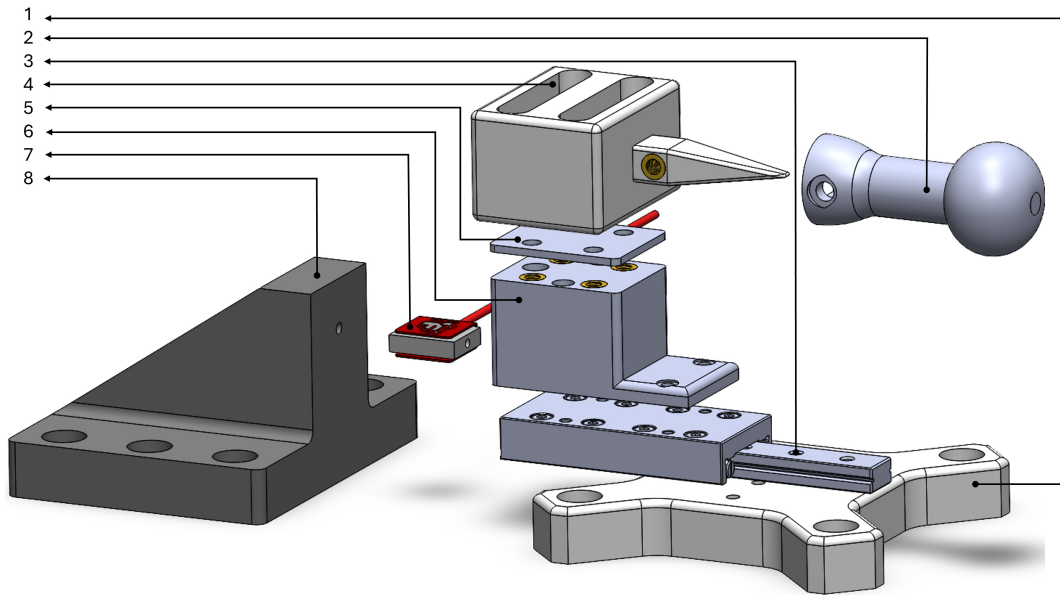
Exploded view of the Measuring stage: 1: Connection plate for the linear guide, 2: Test object, 3: RTS-2065 Linear guide system, 4: Object mount, 5: Plate for height adjustment, 6: Connection mount, 7: Futek LSB200 load cell, 8: Load cell mount.
